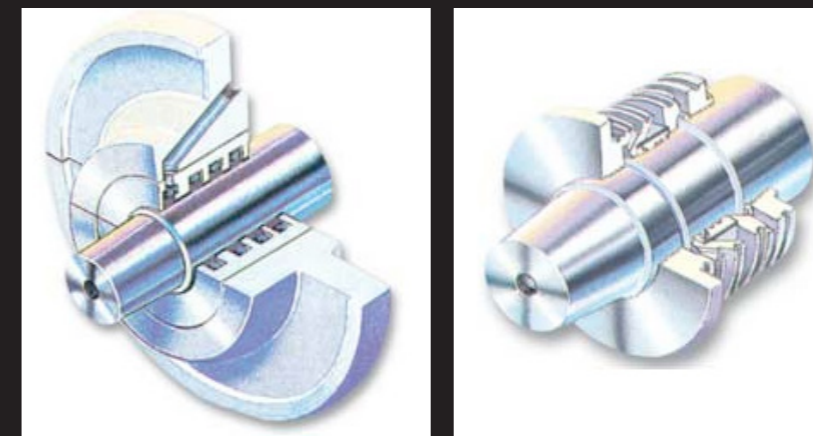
(CONTINUED) - TRADITIONAL COMPRESSOR SEAL DESIGNS
